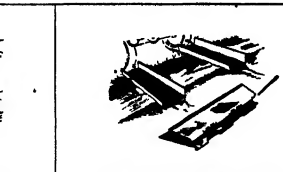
Moulding will approximate this design, portable methods. The idea is R. H. Gallagher's.
